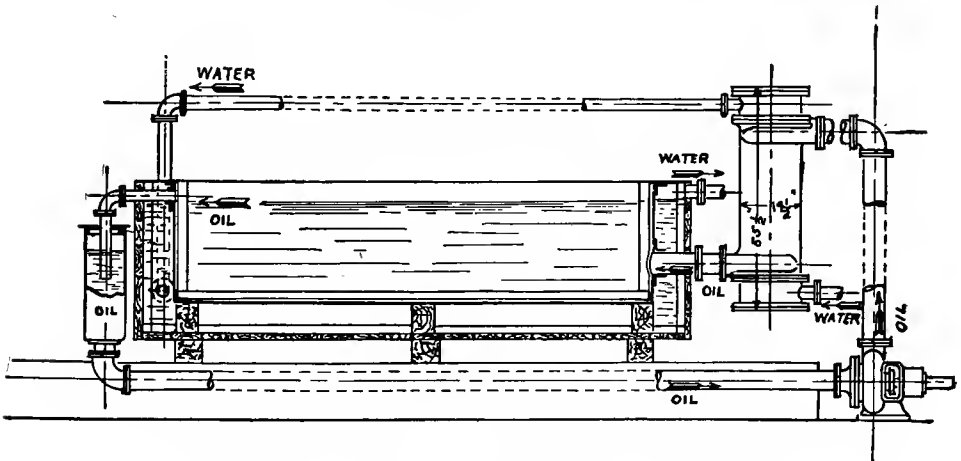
Method of cooling quenching tank oil with S. & K. Oil Cooler.
